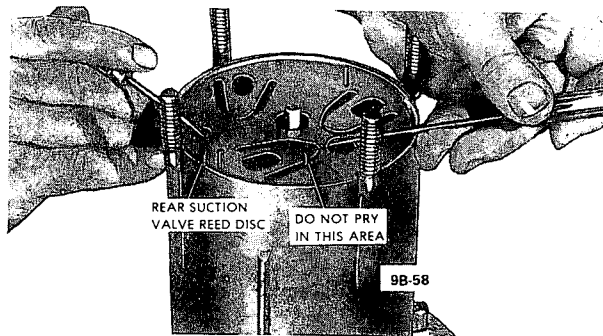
B-83 Removing Rear Suction Valve Reed Disc - 6 Cylinder Compressor
